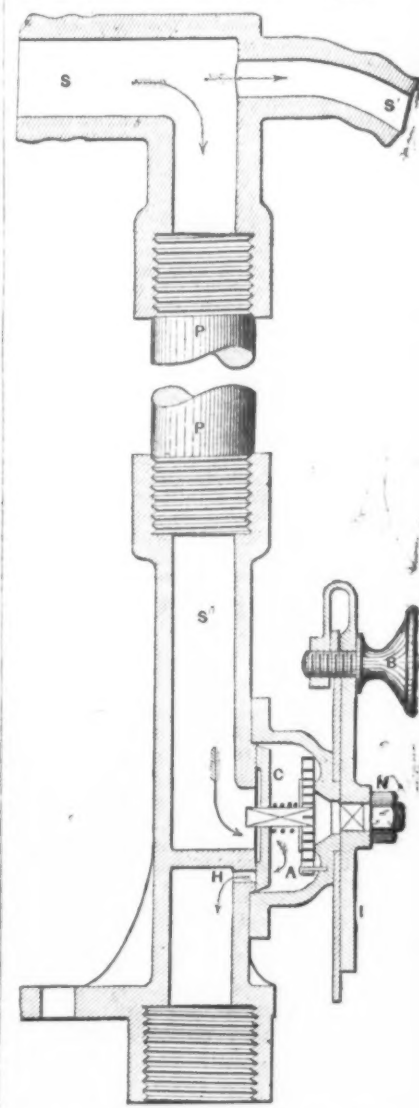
Sectional View of Regulating Valve and Supply Pipe.
